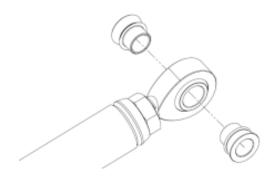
Each rod end gets 2 rod end spacers (also known as misalignment bushings)
